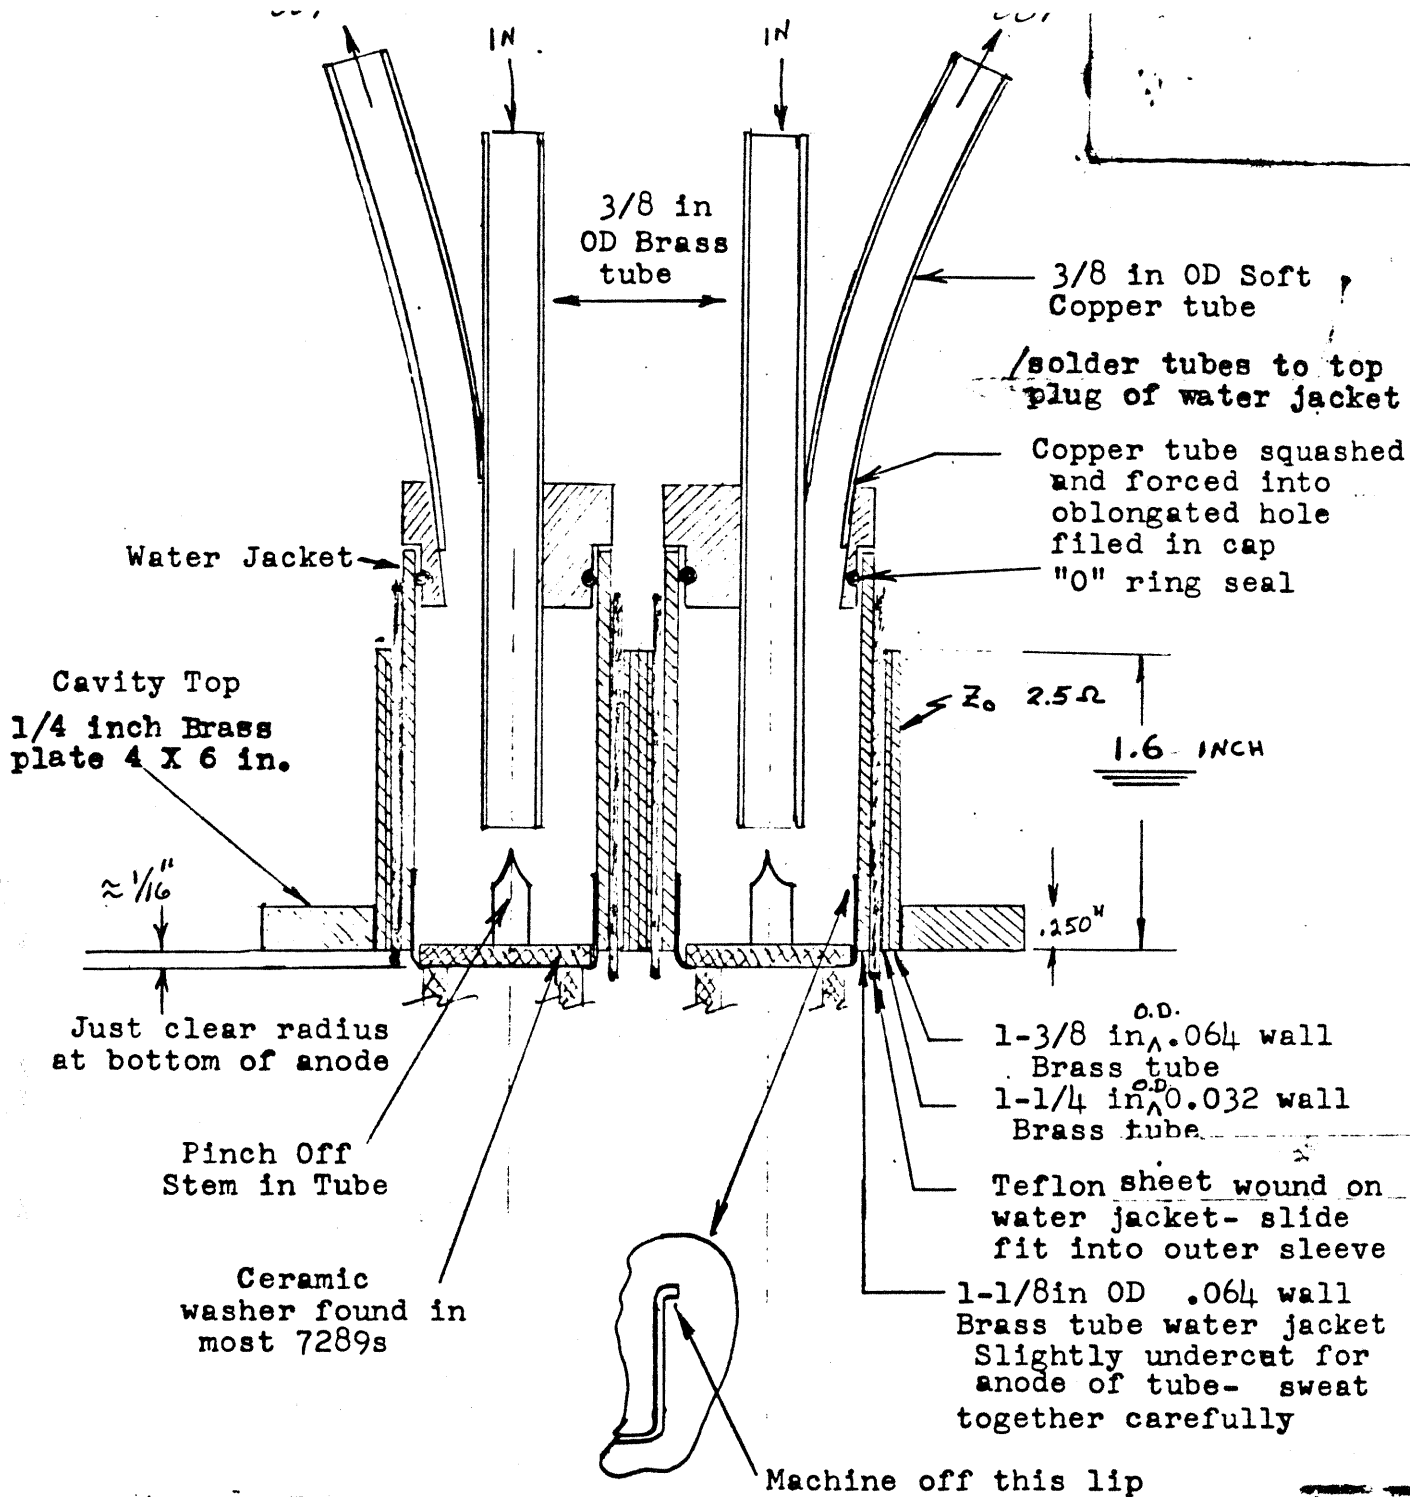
Cross sectional view of water jacket assembly and resonant coaxial by-pass capacitor. Standard brass tube is indicated for convenience. The 1-3/8 and 1-1/4 inch O.D. tubes are forced together and soldered.
